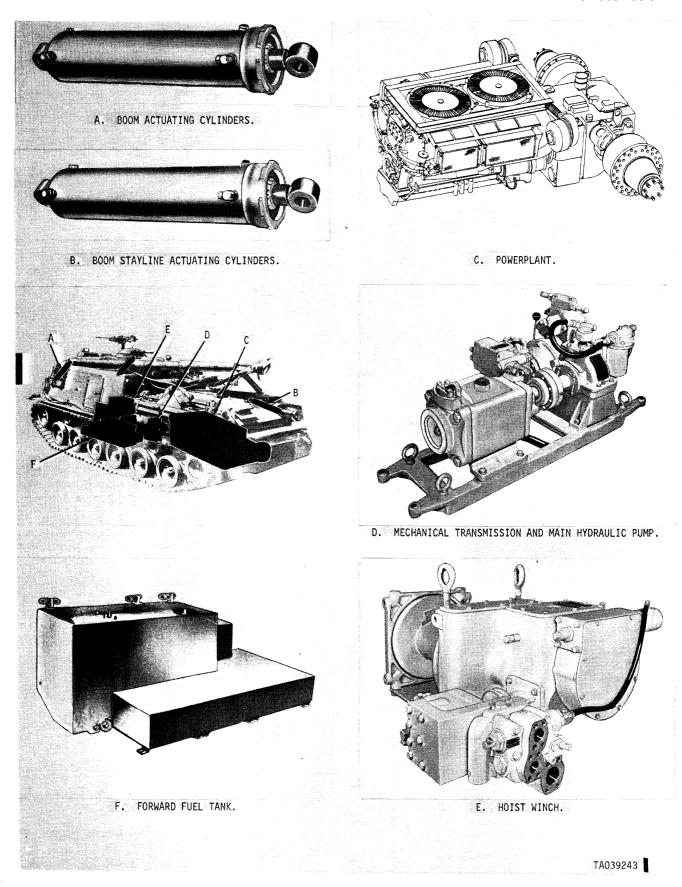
Location of major components, assemblies and auxiliaries (Sheet 1 of 7).
